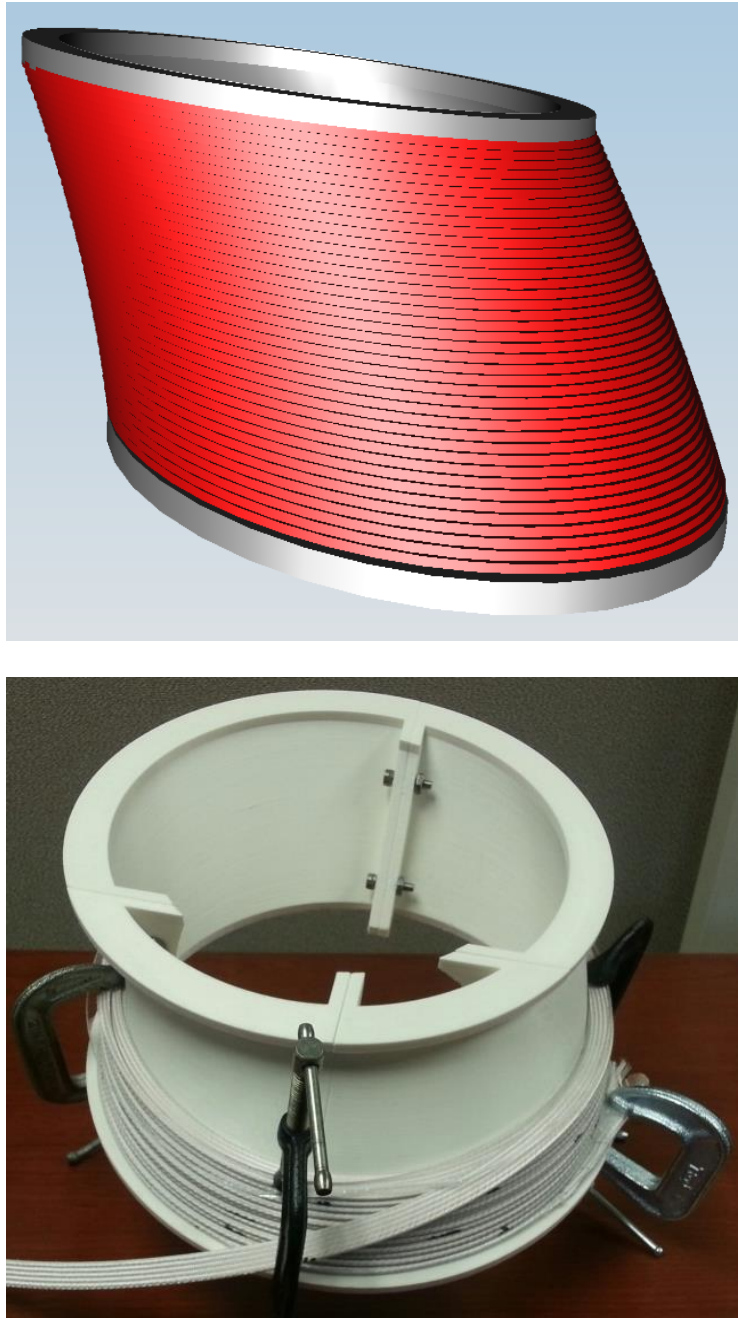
Conceptual drawing (upper) and 3d printer version (lower) of the Nb₃Sn HS spool and conductor that will be fabricated and tested in the Fermilab Vertical Magnet Test Facility. The test will use two layers of cable.
